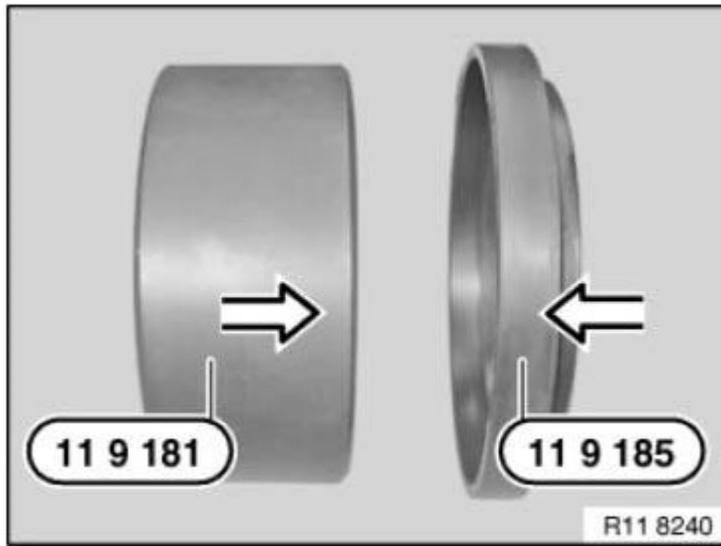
Connecting Special Tool 11 9 185 Onto Special Tool 11 8 181
